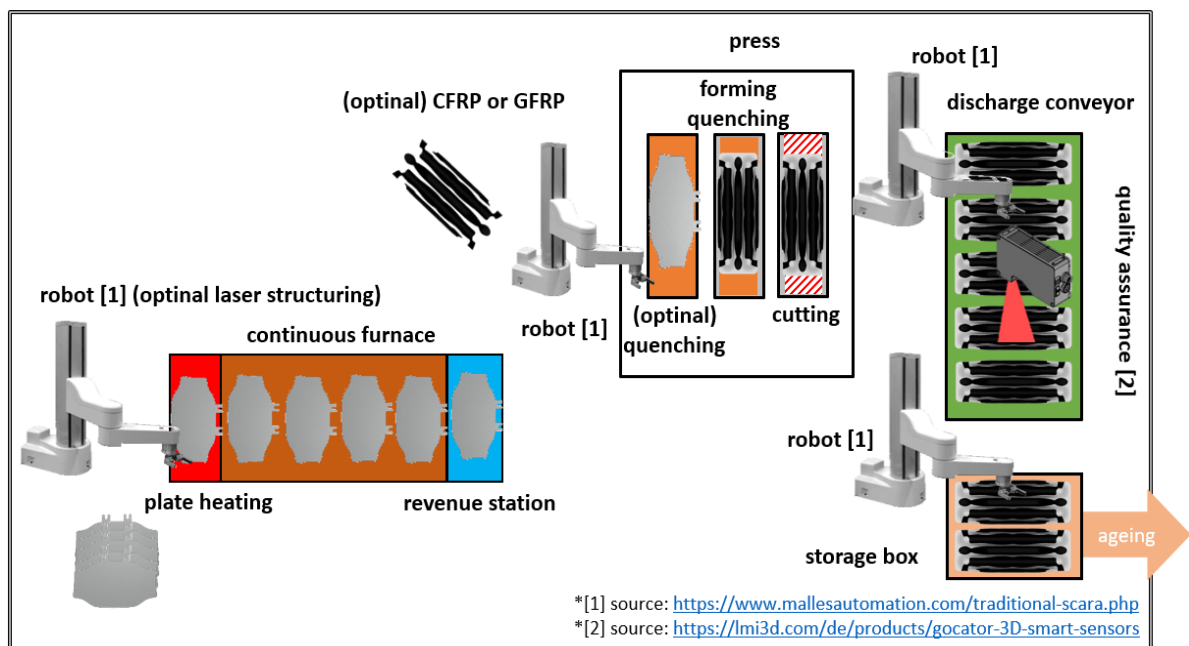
Schematic industrial layout of (Extended) Hotforming
